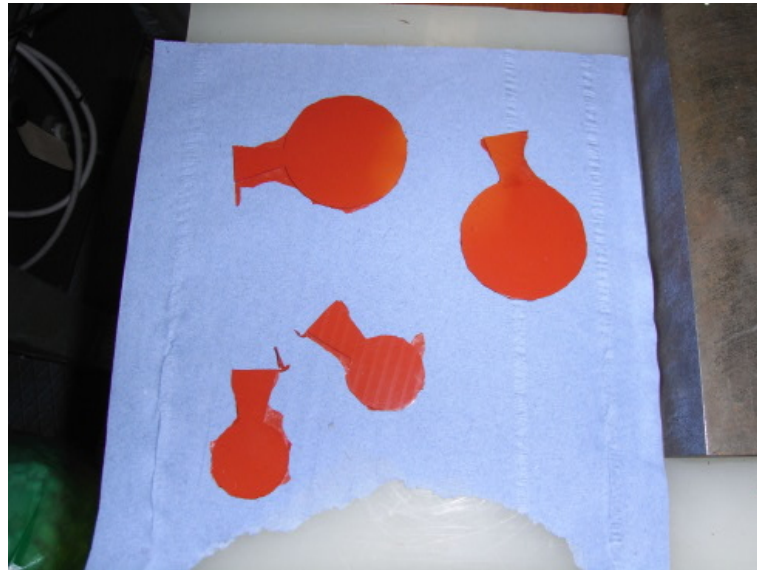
Radial pads just out of the mould. The excess stalks must be removed and the edge of the pad trimmed to remove thin excess that slipped between the mould plates.
